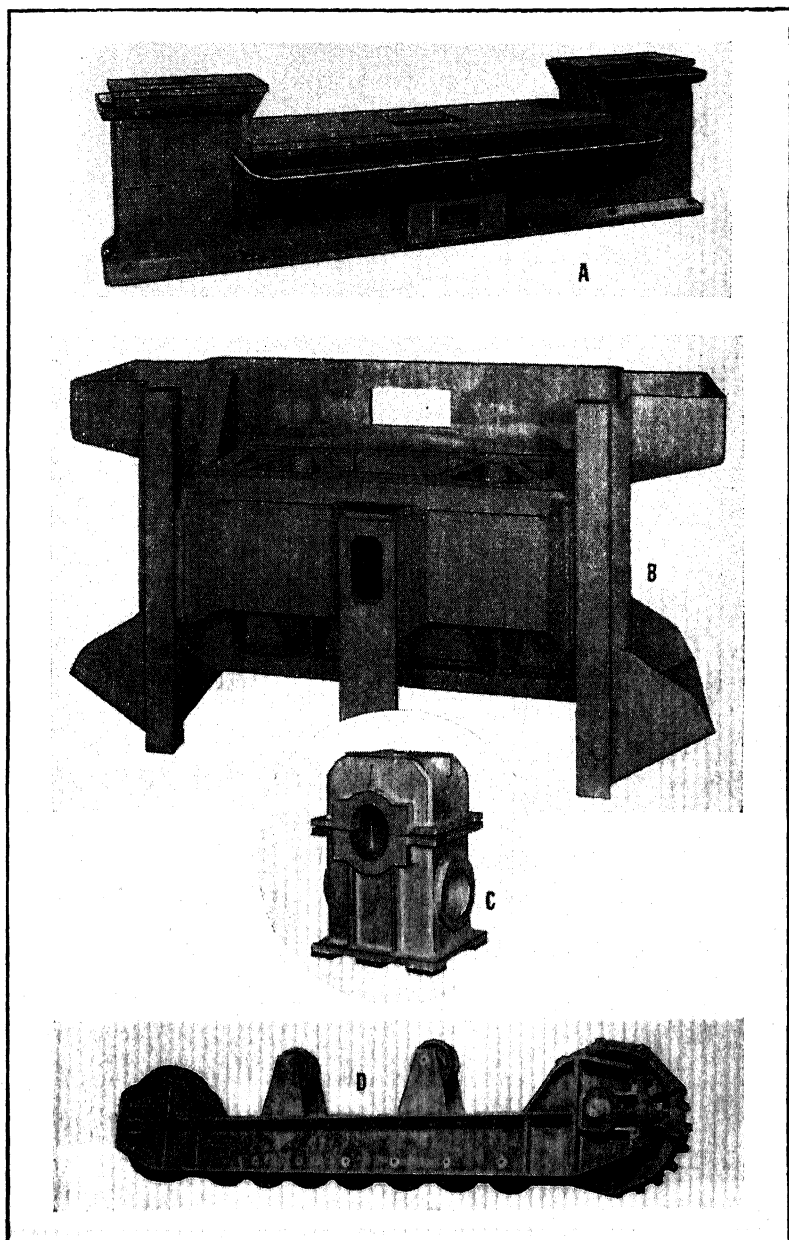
BASES—(A) 4,300 lb. base for axle housing machine tool. (B) 1,505 lb. table for breaching machine. (C) 2,500 lb. gear reducer housing. (D) Crane runner.
